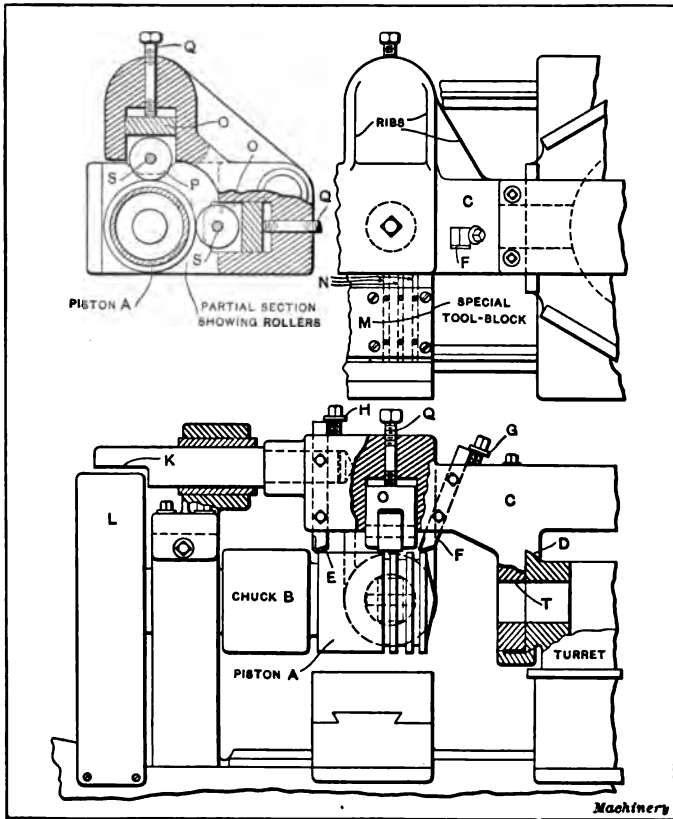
Multiple Turning Tool equipped with Pilot and Roller Back-rest
